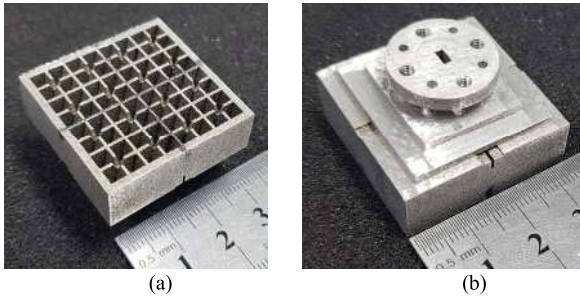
Photographs of the 3D printed 8×8 horn antenna array prototype. (a) Top view, (b) bottom view.
